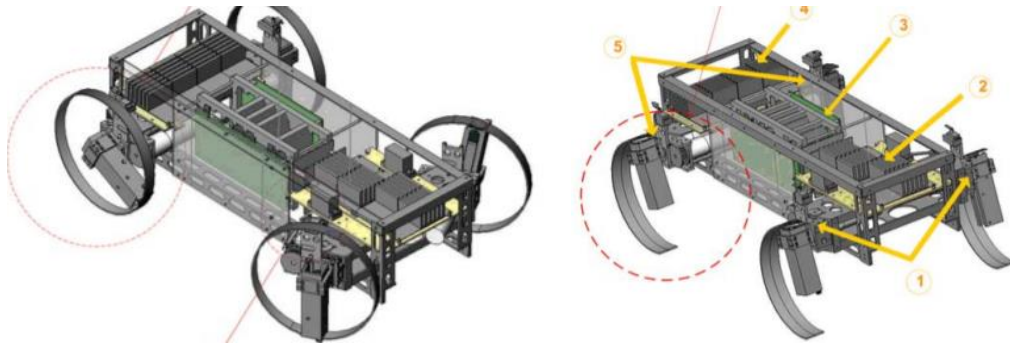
CAD drawings of robot operating in wheel (left) and leg (right) modes⁽¹⁰⁾
